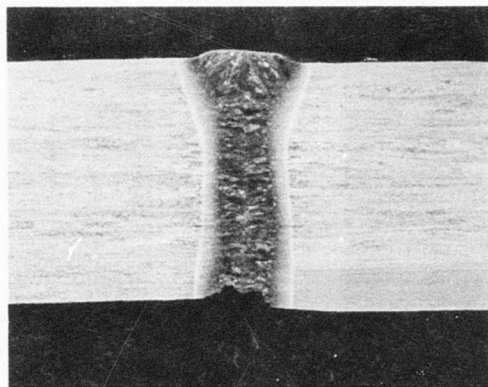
INCONEL 718 WELD CROSS SECTIONS (3/8 INCH THICK)
